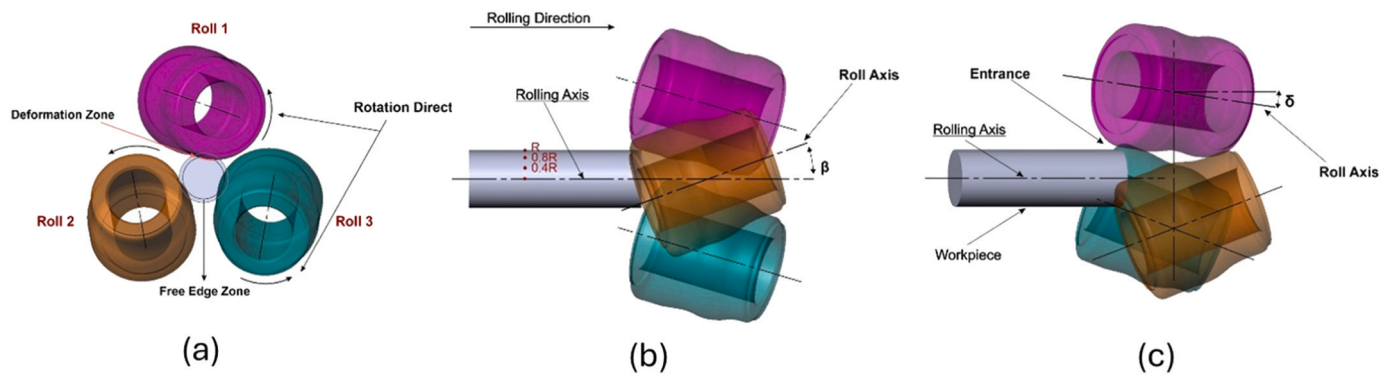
RSR with screw rollers: (a) Principal scheme, (b,c) 3D models of workpiece and screw rolls.
